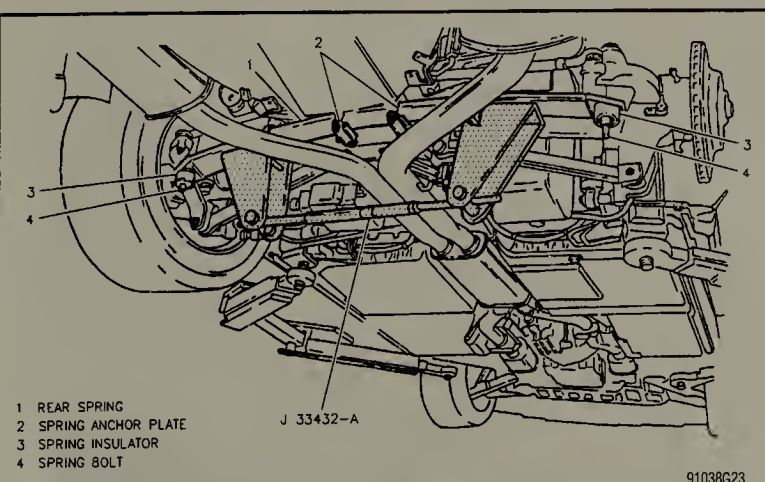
Removal of the rear transverse spring requires the use of a spring compressor on 1990–96 vehicles
